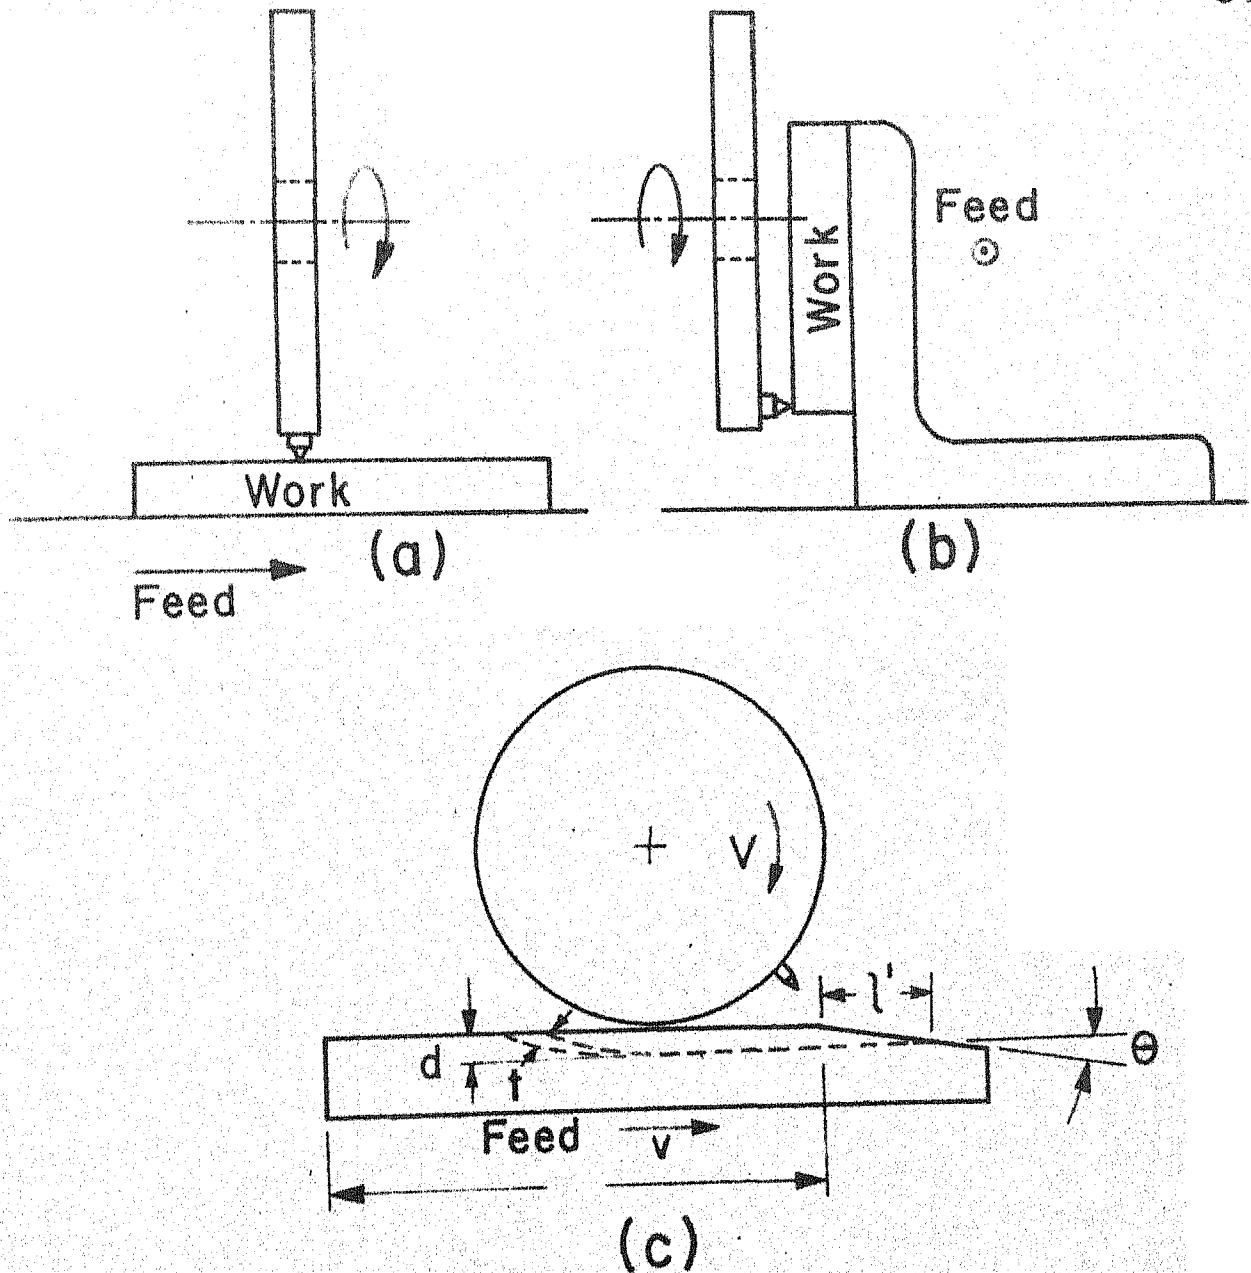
Diagrammatic Sketches Showing (a) Plane Flymilling, (b) Face Milling And (c) Overcut Flymilling.
